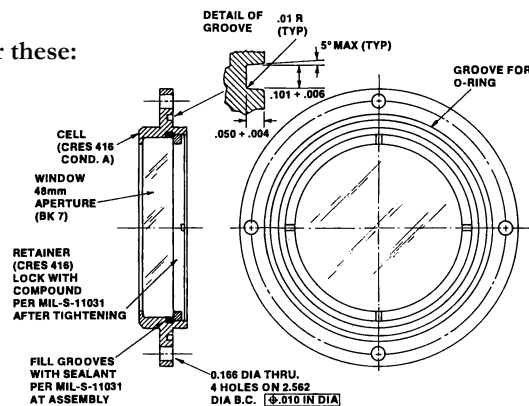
Glass window constrained by a threaded retaining ring and sealed with elastomer. Dimensions are in inches. (From Yoder.²)
